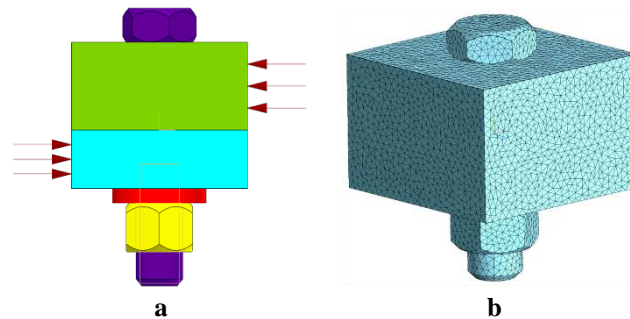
Calculation conditions: a – constant load application; b – dividing the bolted joint model into finite elements.
